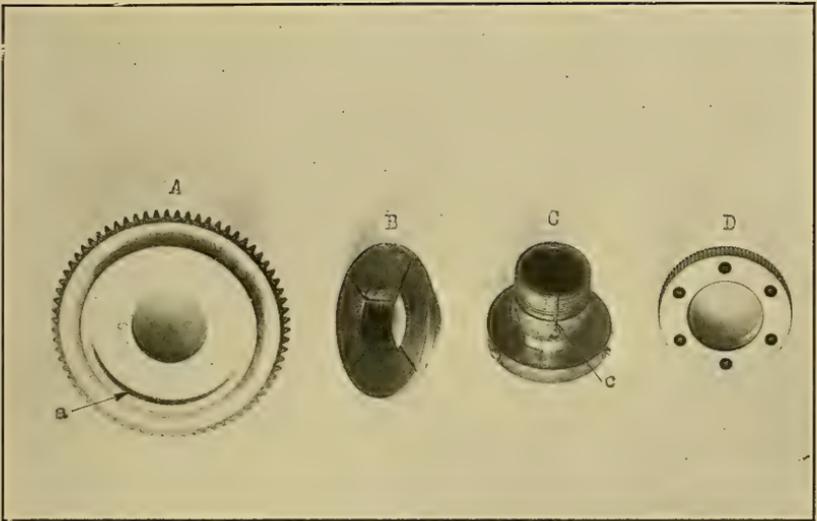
DETAILS OF RELEASABLE GEARS, TIDE-PREDICTING MACHINE.
